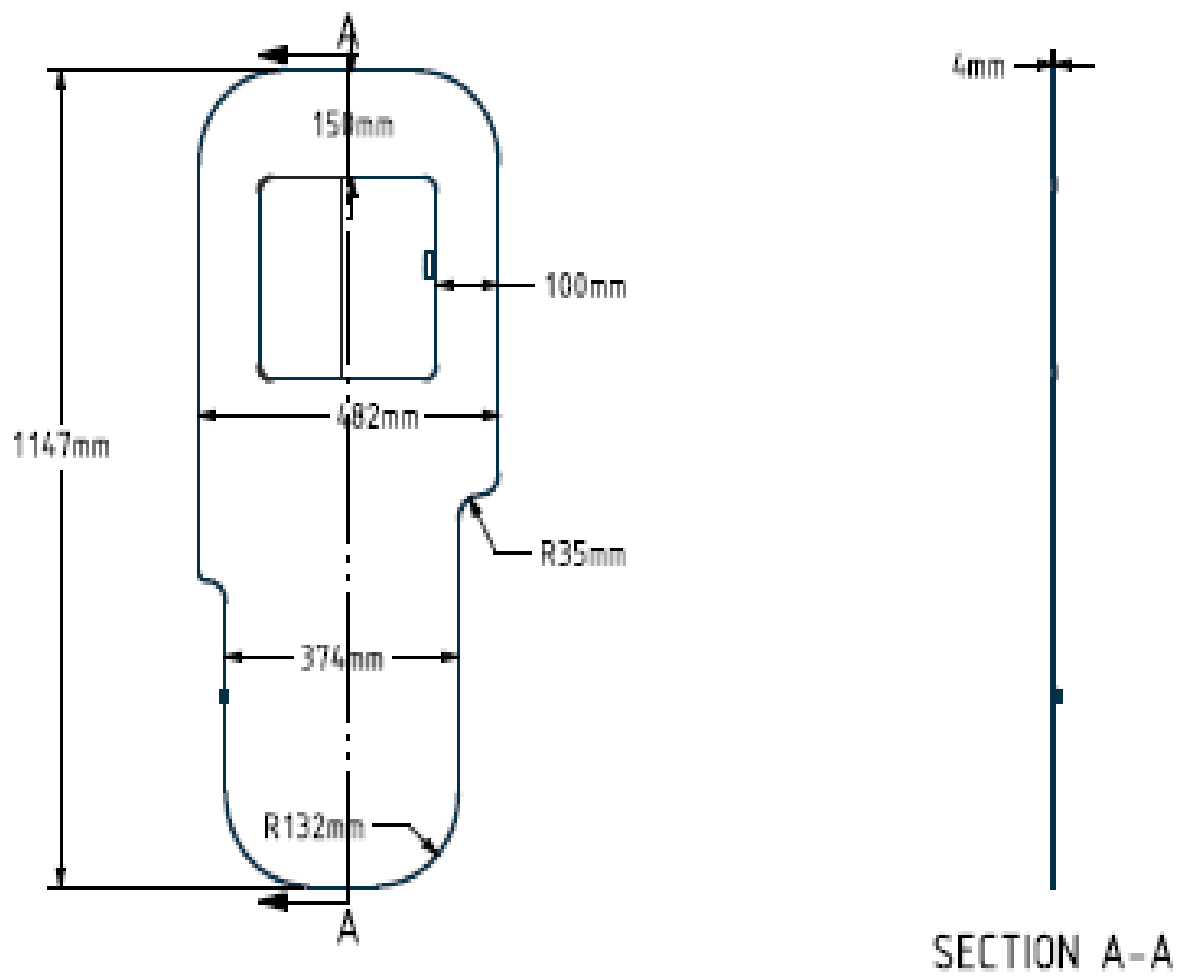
Model drawing of three- wheel Bajaj for compact model 205 rear side door
